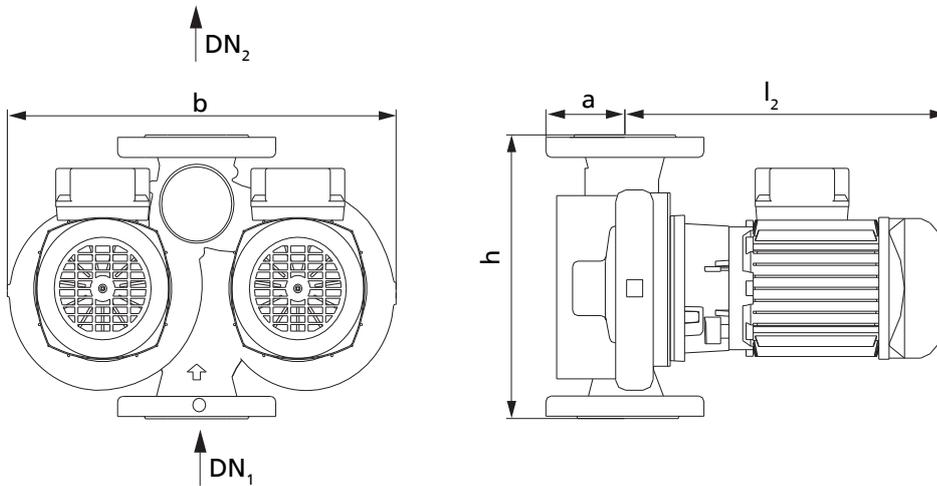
Dimensions of flanged pump set, size 032-032-100
